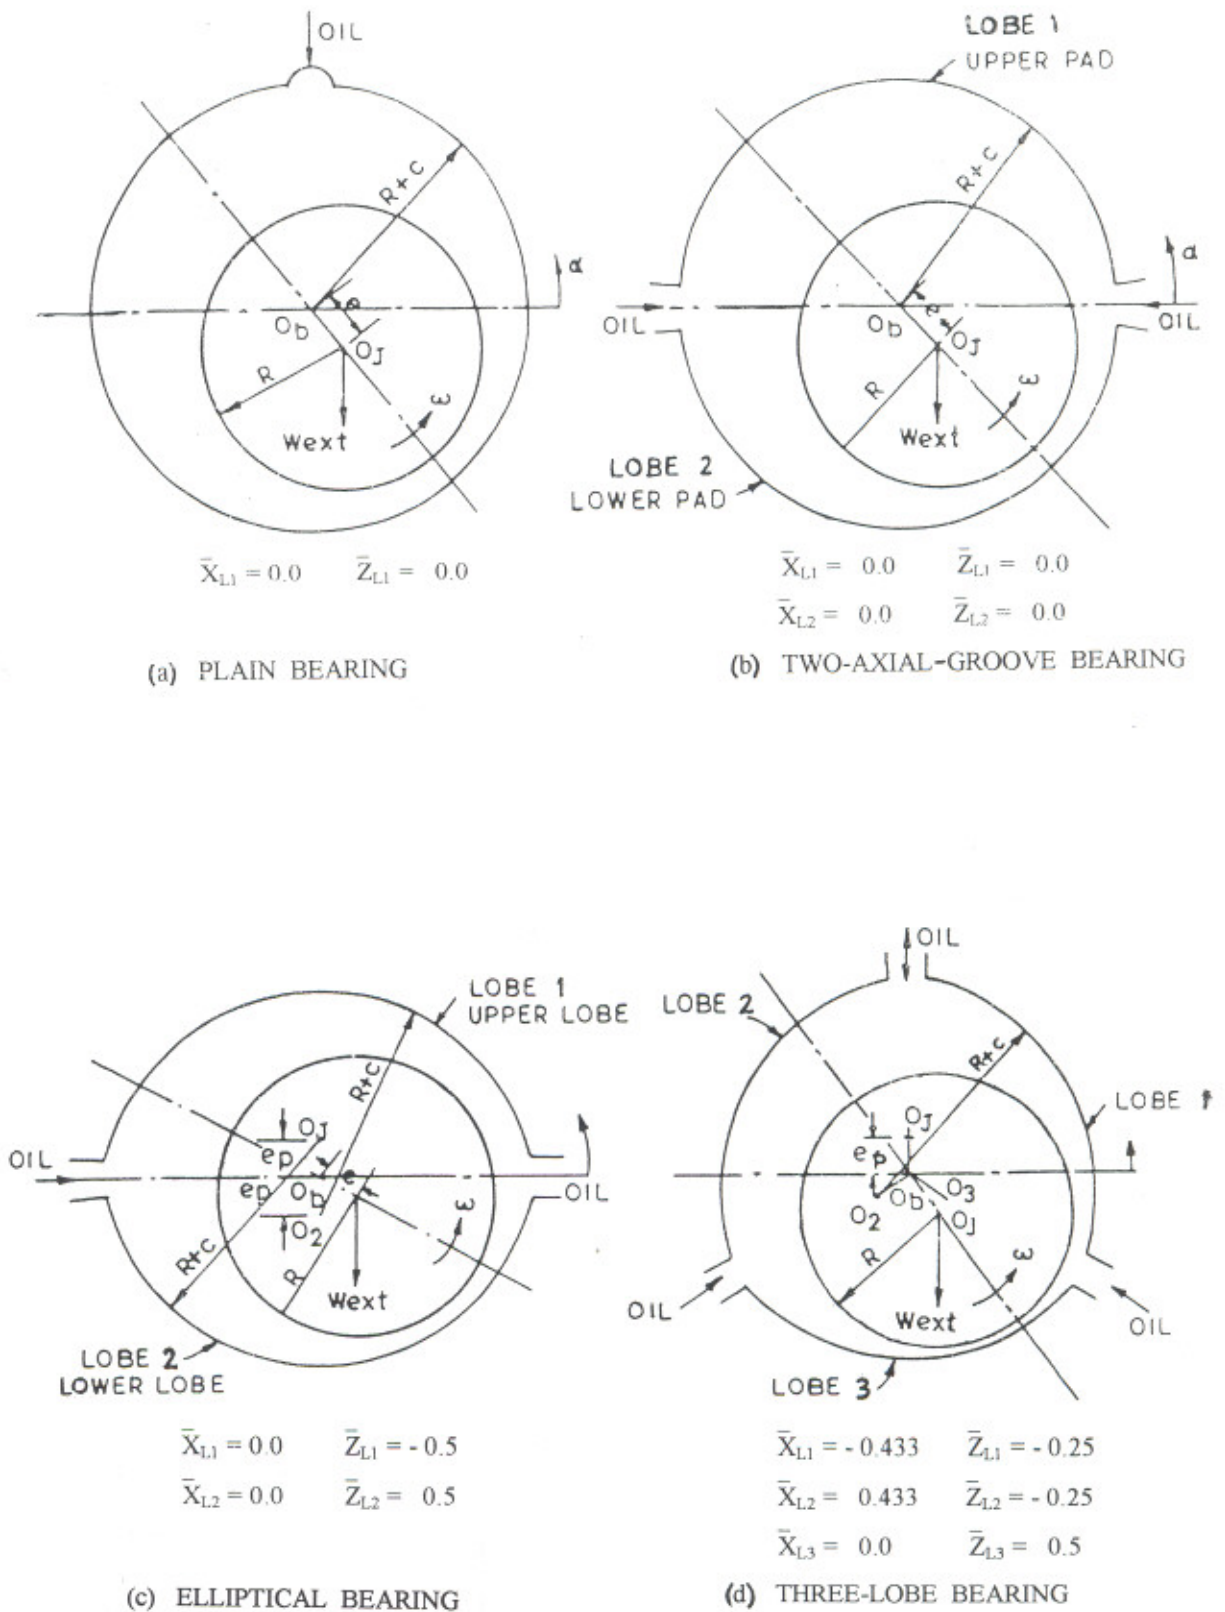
JOURNAL BEARING GEOMETRIES
